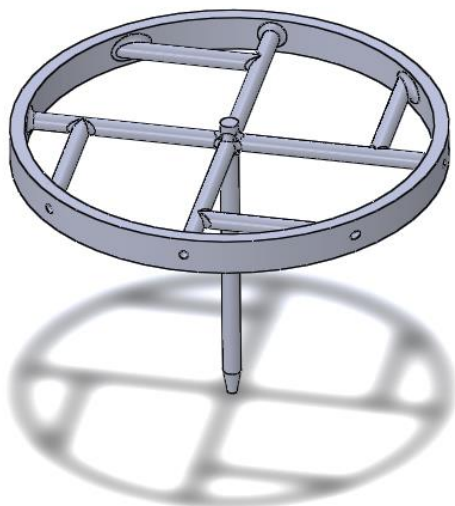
Spinning Disk design that was rapid prototyped and tested, original drawing.
